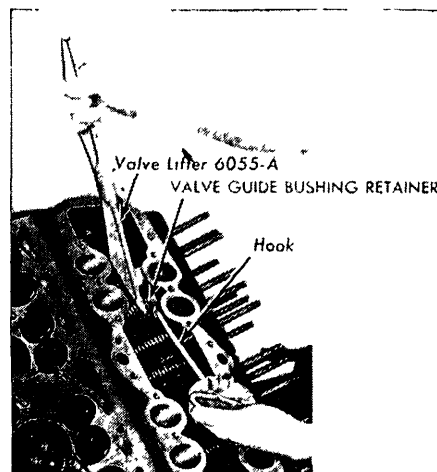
Removing valve guide retainer, 1935-52 Ford and Mercury V8 and Lincoln 1936-48
